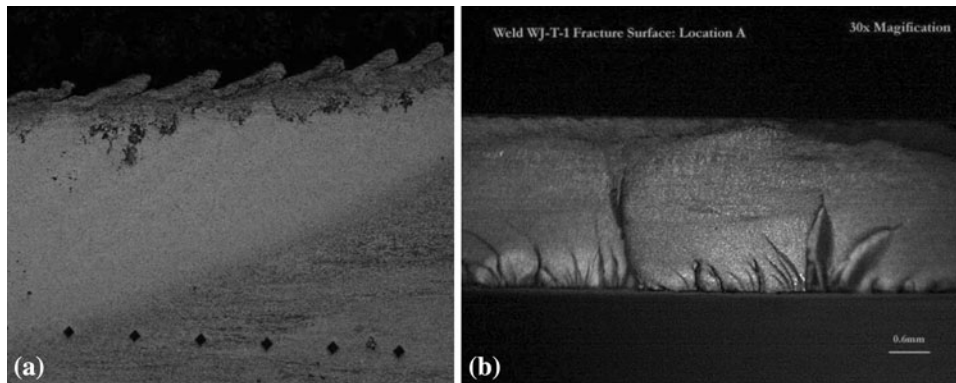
Typical FSW specimen sub-surface and fatigue fractured surfaces: (a) a sectioned weld nugget at 5 \times and (b) multiple fatigue fractures across the top surface of a fatigue test coupon at 30 \times
